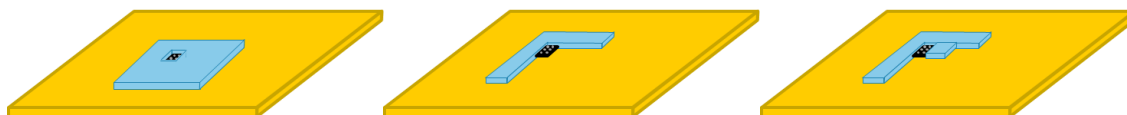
Examples of Securing a Package Using FR4-Based “Holders”
